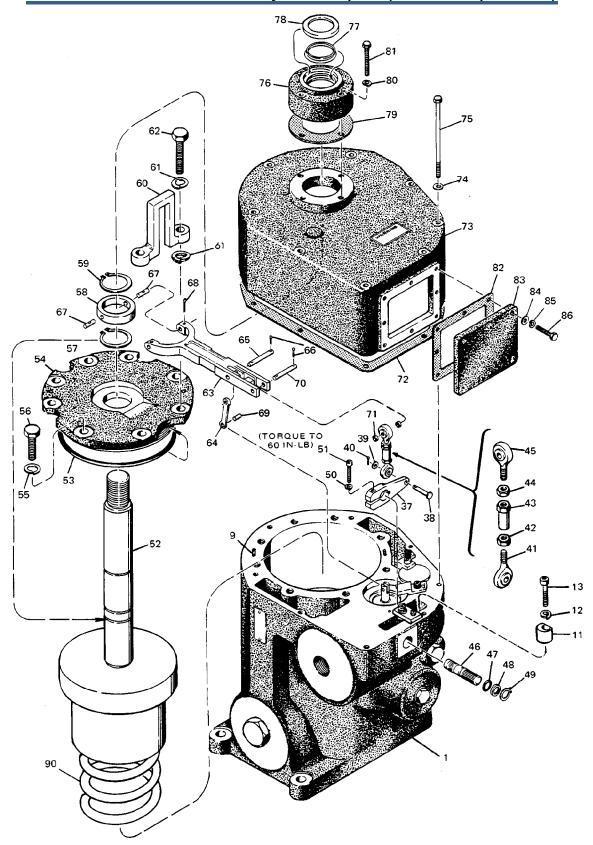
Exploded View, Mechanical Input-Hydraulic Amplifier
